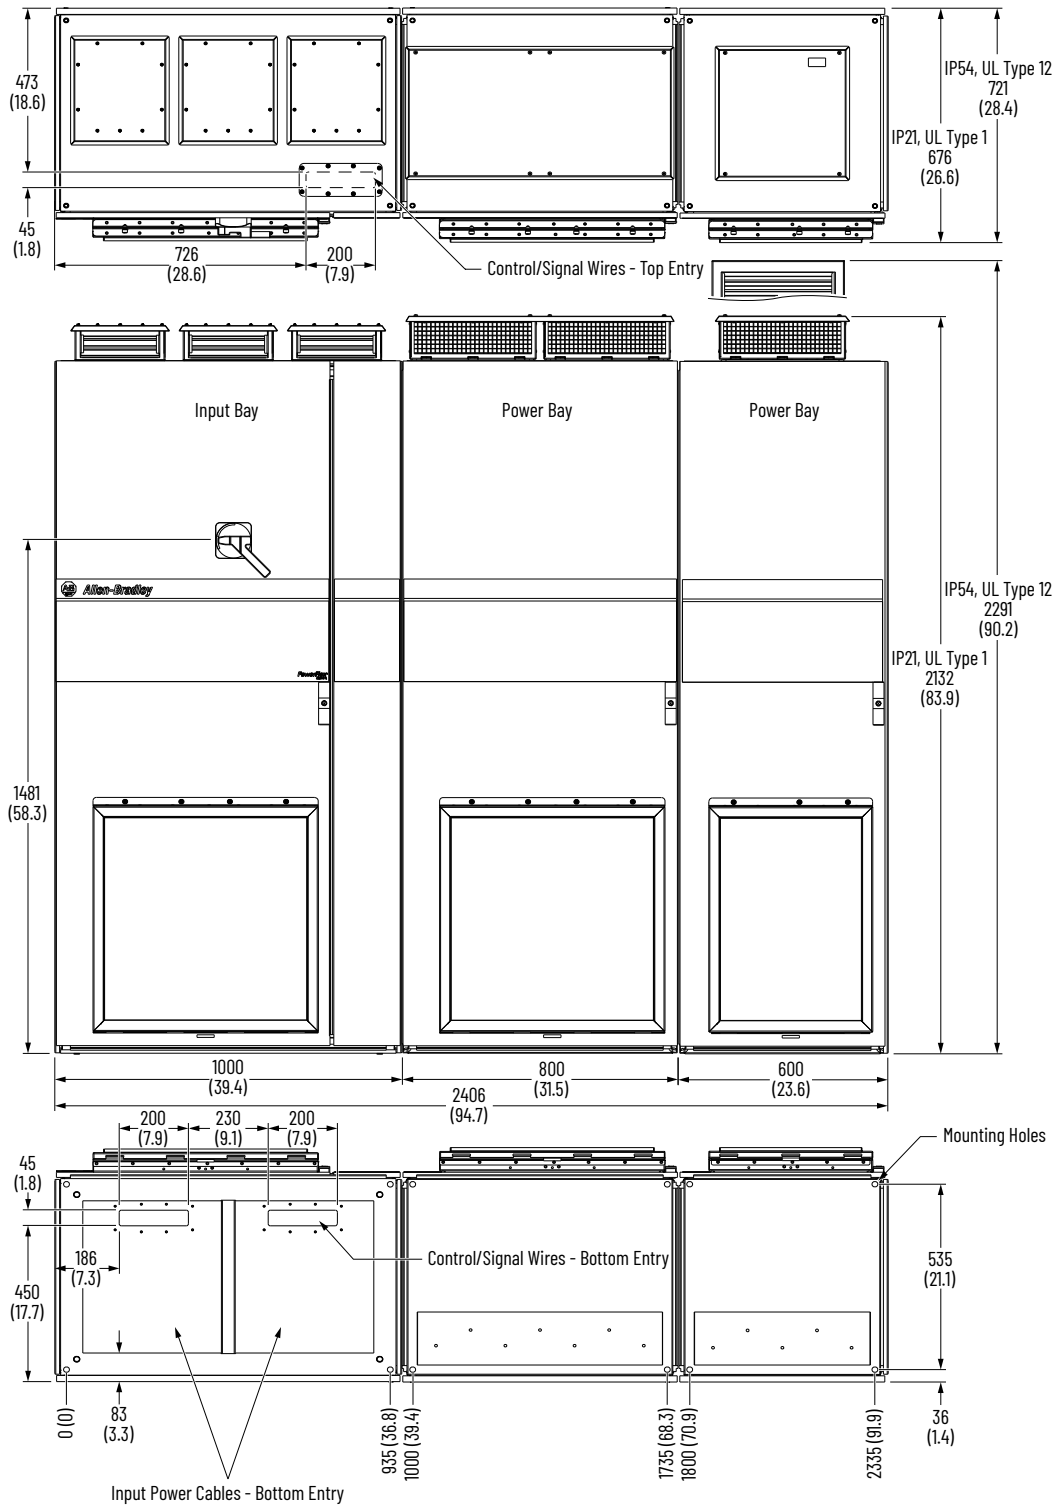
Frame 9 Bus Supplies Top, Front, Bottom, and Side Views—Dimensions are in mm (in.)
